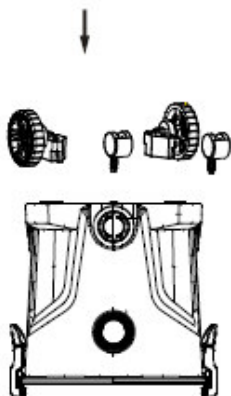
Wheel mounting of wetCAT 120 RH and wetCAT 131 IRH
